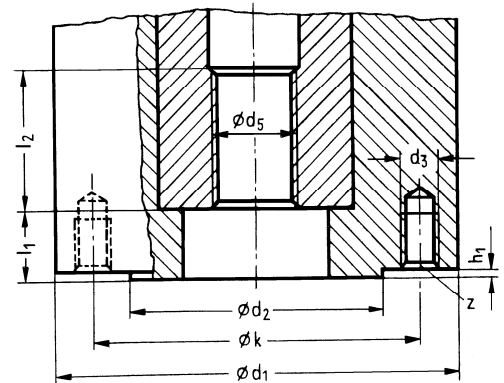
Output shaft A (hollow shaft with stem nut) with flange dimensions
